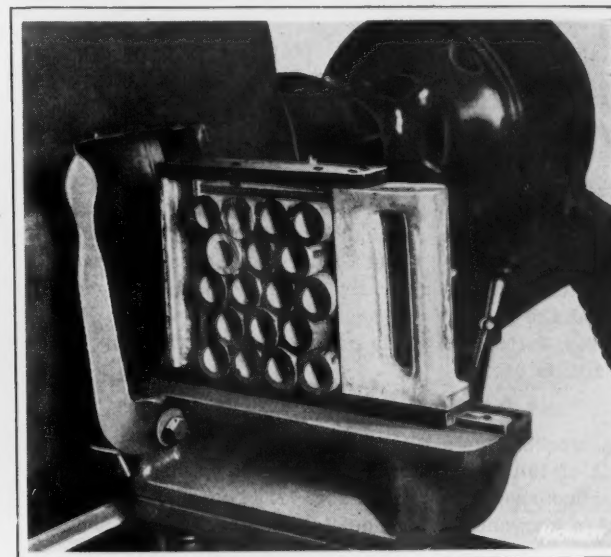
Bronze Bushings loaded in Fixture for End-grinding Operation
